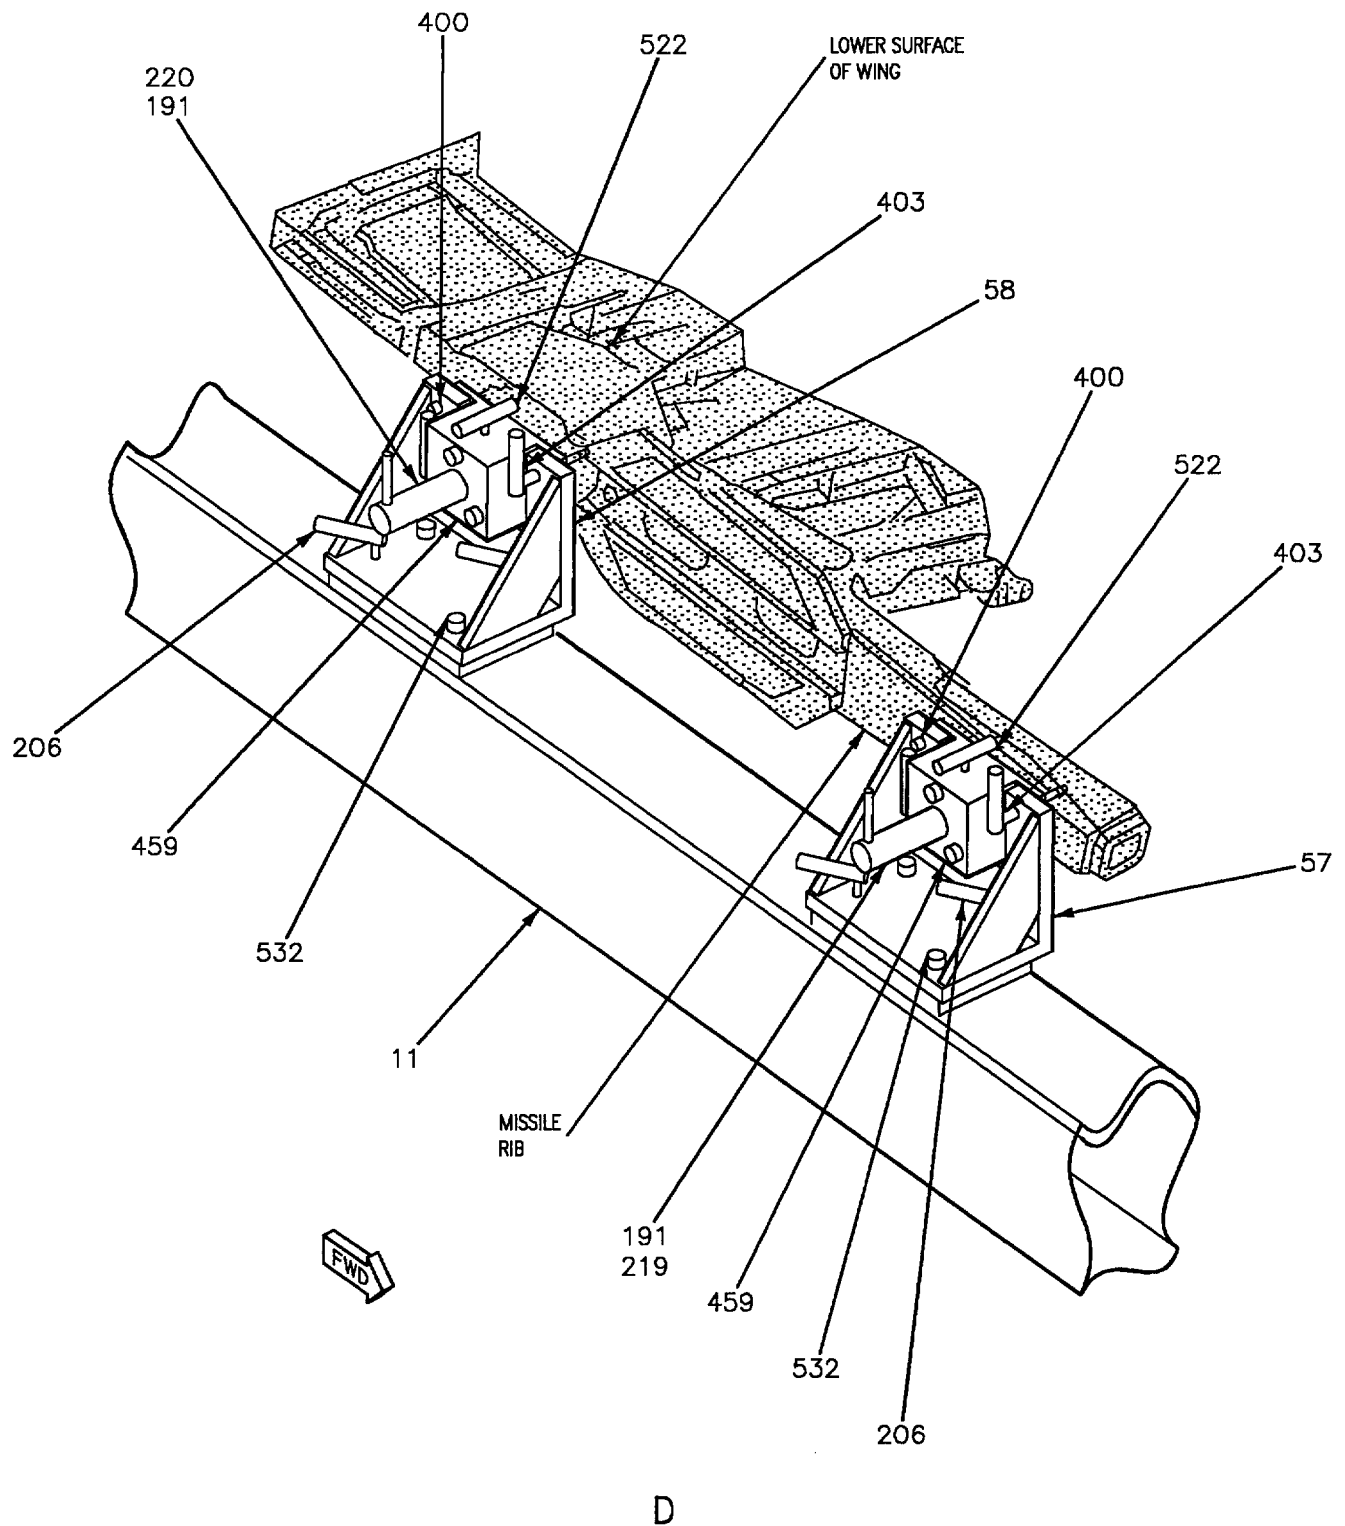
Installation of Outer Wing into Fixture (Sheet 4)
